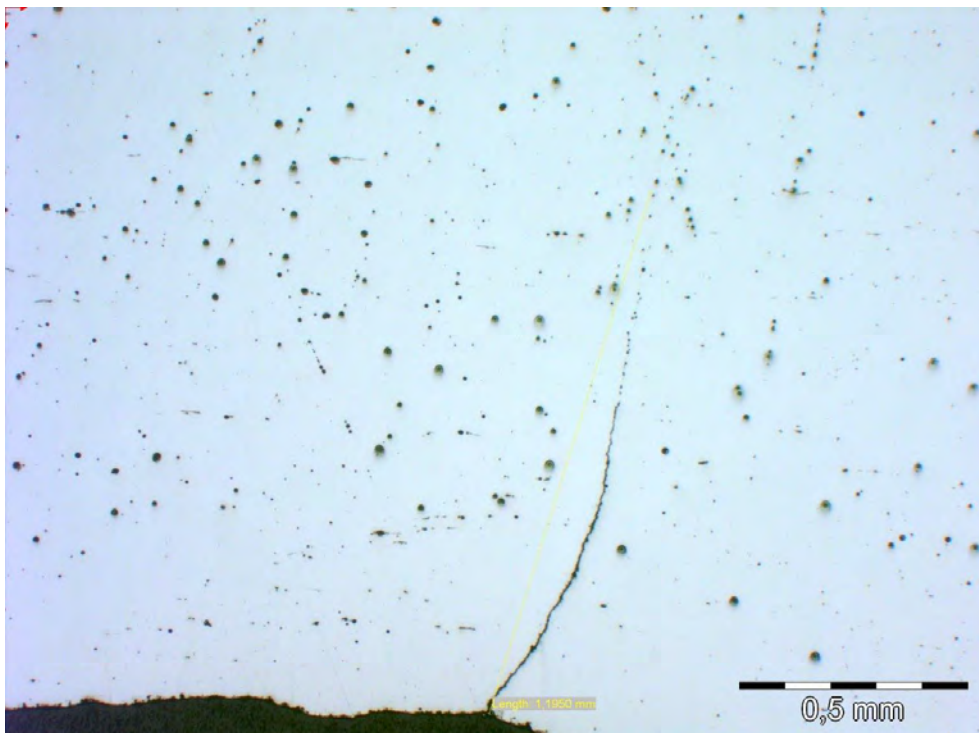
Cut four in crack at segment B, first ridge on barrel no. SFK 0120-A
